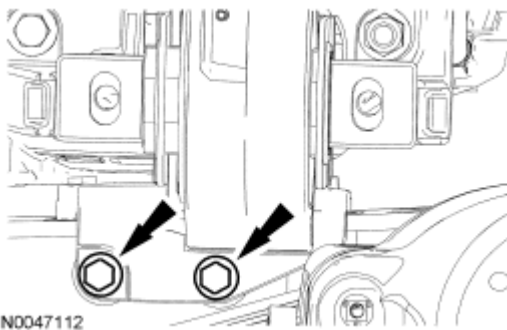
Locating Upper Bolts On Rear Transaxle Insulator
